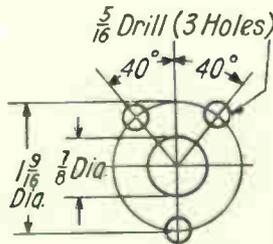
DRILLING PLAN FOR TYPE W INSTRUMENT AND CONTROL SWITCHES
